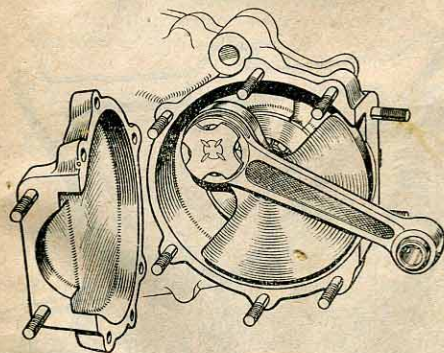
How the crankshaft assembly is mounted in the crankcase
